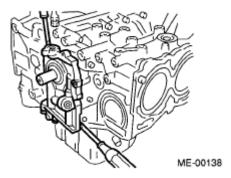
Removing Relief Valve Plug Courtesy of SUBARU OF AMERICA, INC.
